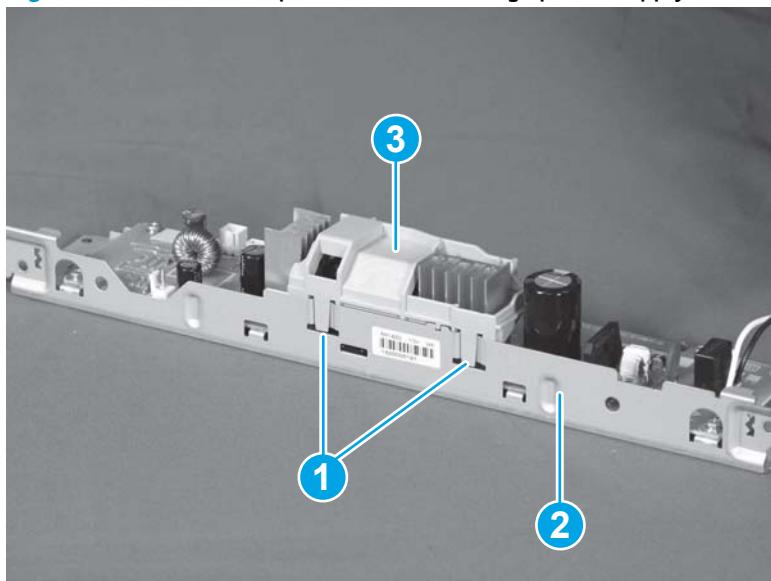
Remove the low-voltage power supply assembly and support frame (10 of 10)
